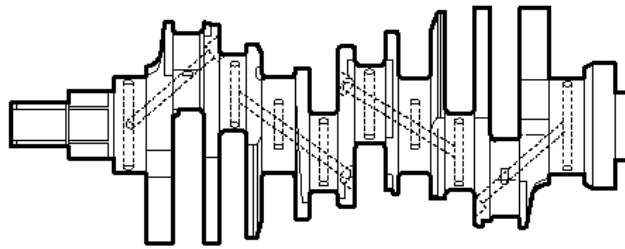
Scheme of a crankshaft and its deep holes devoted to the lubrication
